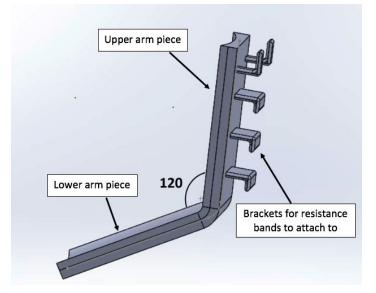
SolidWorks of the L shape base with revised angle of the final design.
